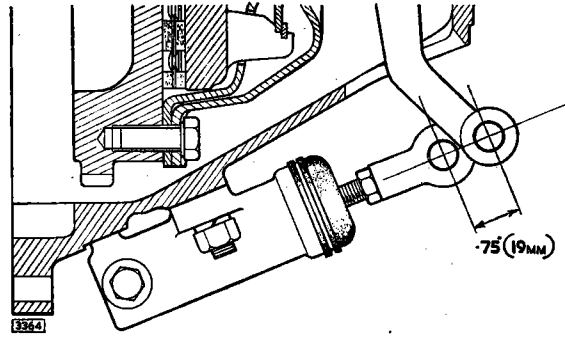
Setting dimension for refitting hydrostatic clutch slave cylinder
